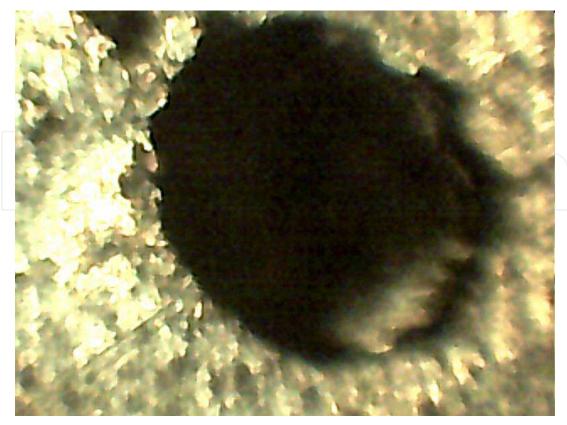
A Blow hole defect in an aluminum casting at $100 \times \text{magnification}$
